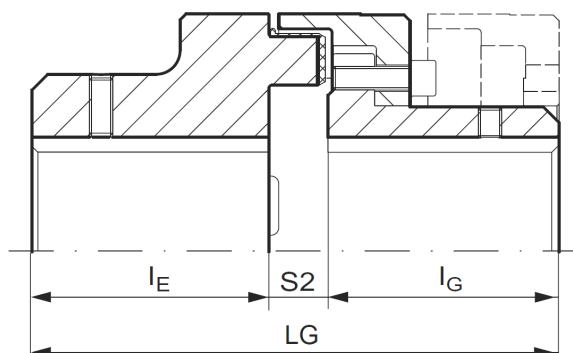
Mounting dimensions of the Nor-Mex G coupling
